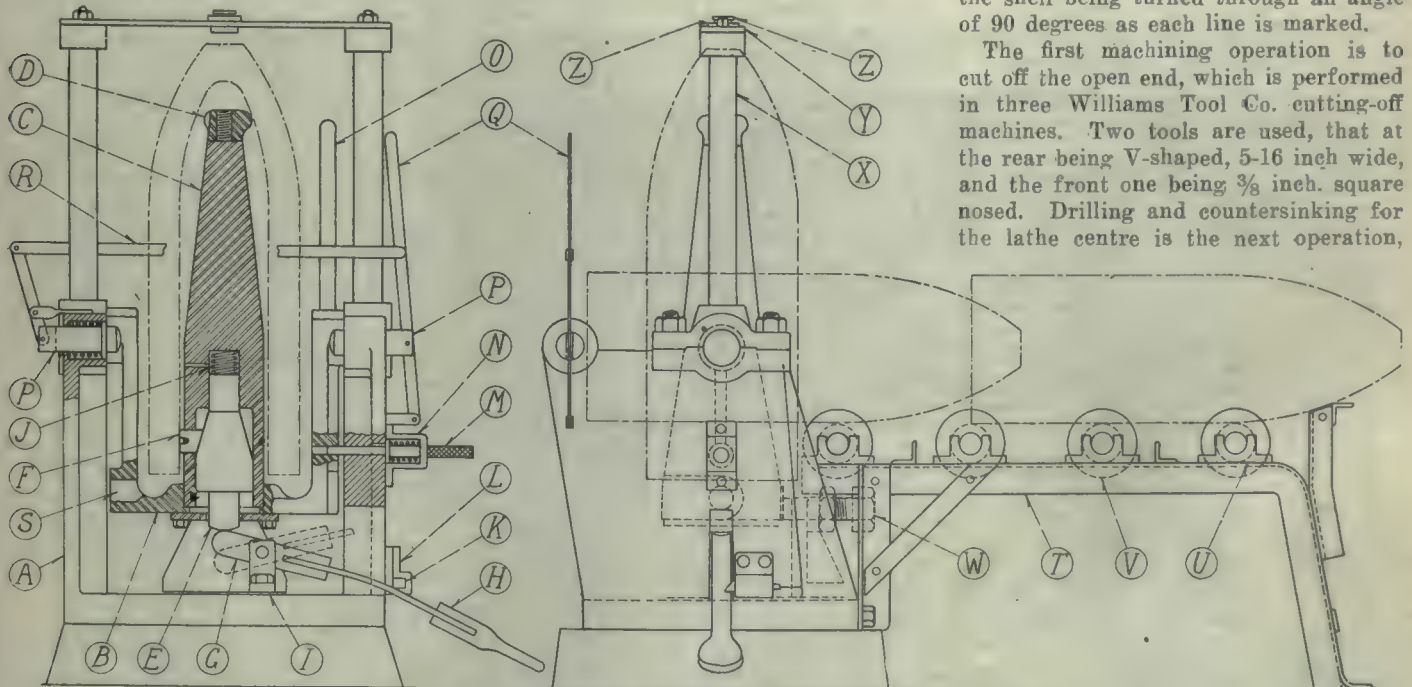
DETAIL OF CENTERING JIG ATTACHED TO BASE OF "BARNES" DRILL.
